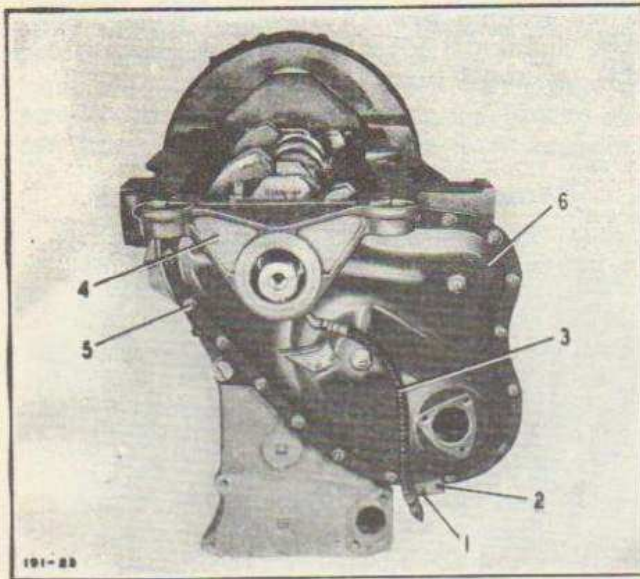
Front End View Showing Front Support and Timing Gear Cover
